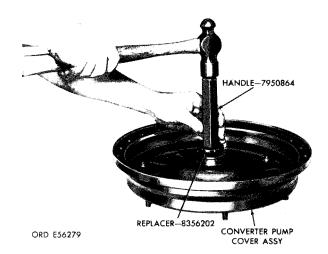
Installing bushing into hub of converter pump cover using handle 5120-316-9182 (7950864) and replacer 5120-572-8656 (8356202).
